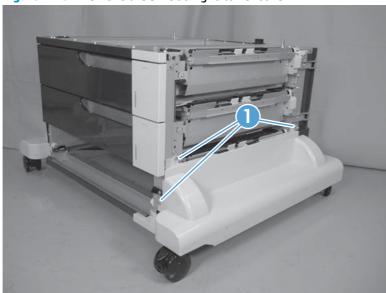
Remove the 3 x 500 right-door assembly (3 of 3)
